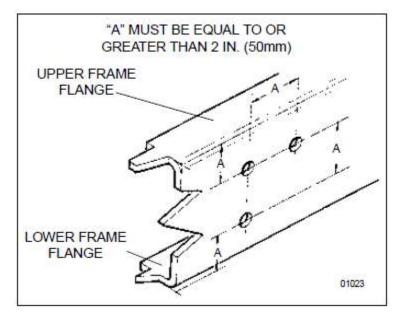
Frame Hole Location Guidelines for Frame Rail and Bracket
